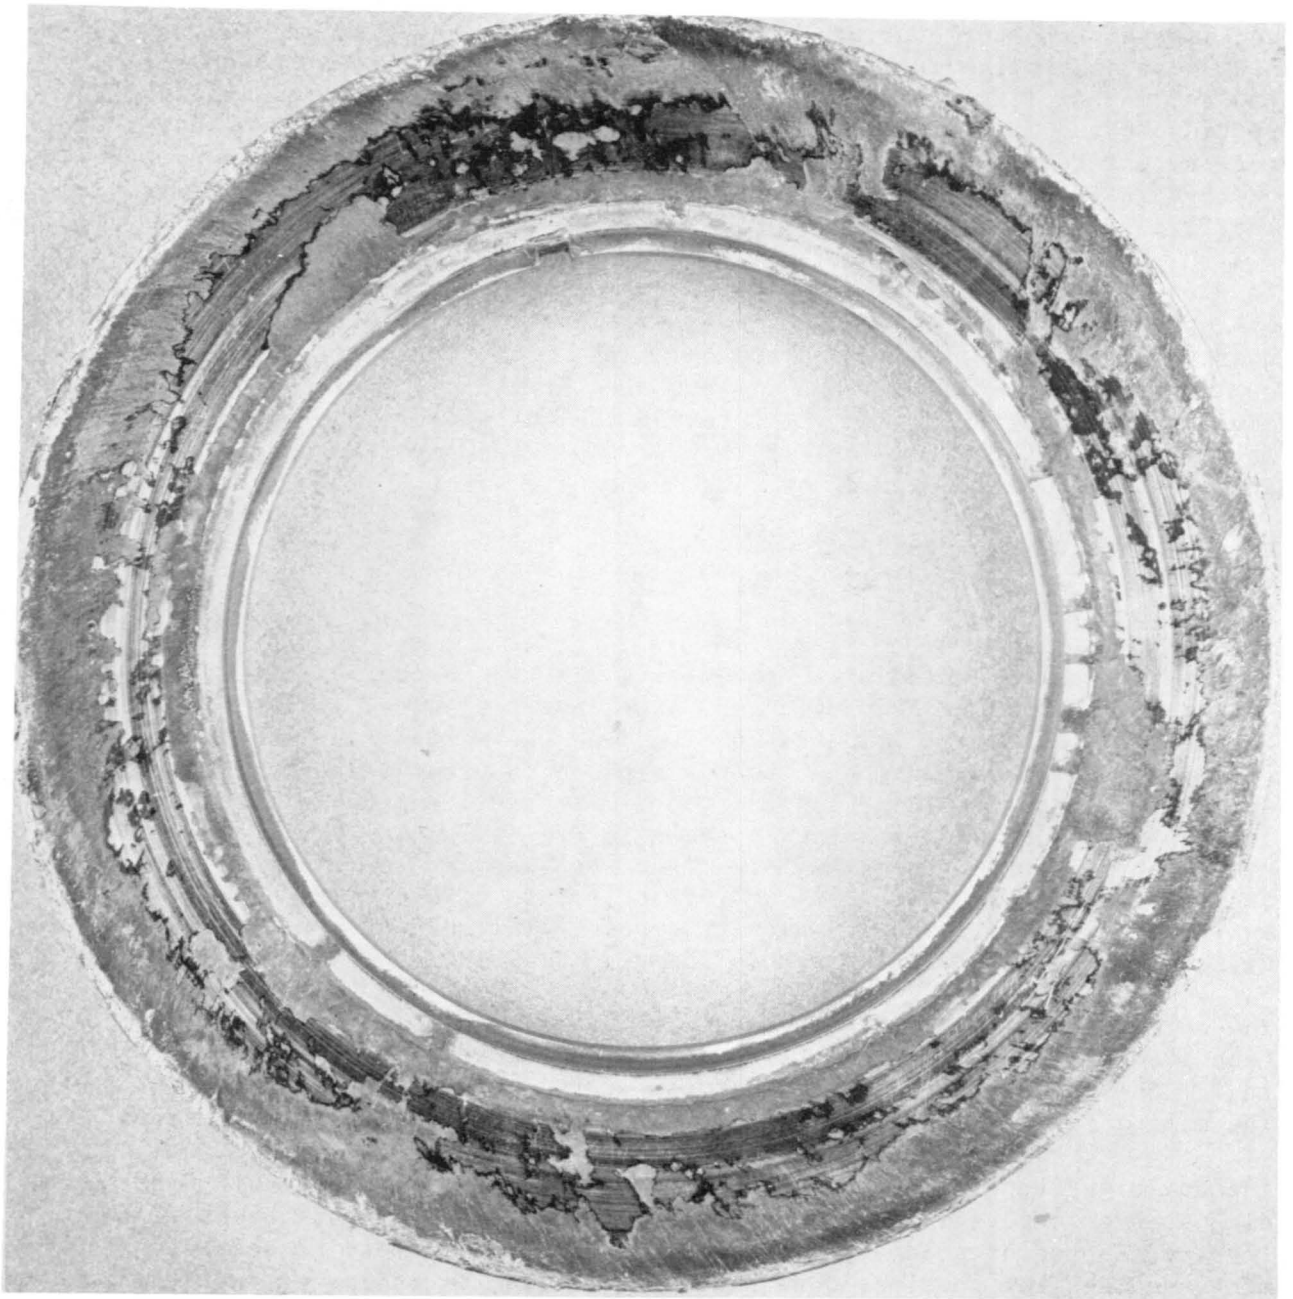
LOX Seal Mating Ring Face, Posttest 176
